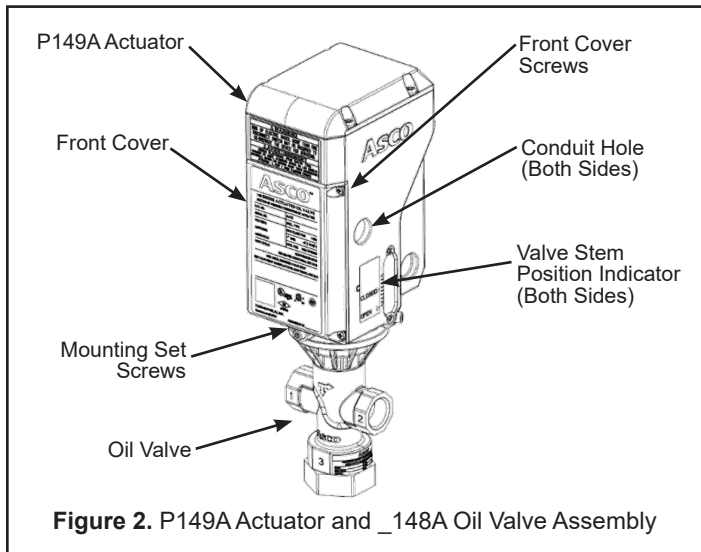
P149A Actuator and _148A Oil Valve Assembly
